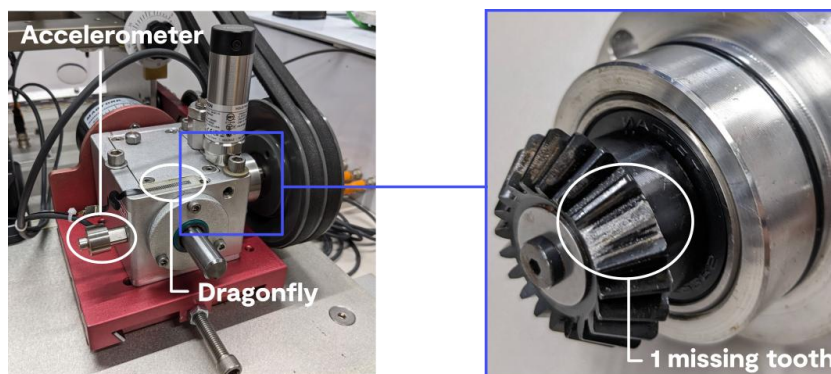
studied gearbox and picture of the faulty gear with one missing tooth. The position of the two installed sensors is shown (Dragonfly and accelerometer).
